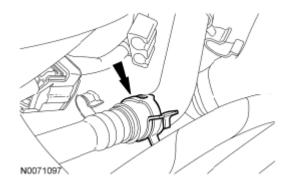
Locating Heater Hose And Coolant Tube Courtesy of FORD MOTOR CO.
